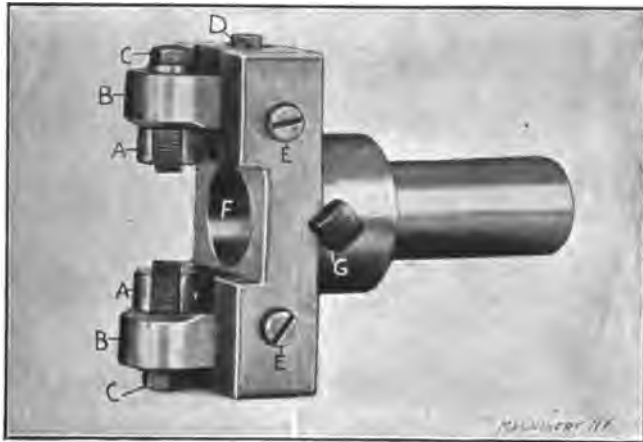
Brown & Sharpe Adjustable Turret Knurl-holder
